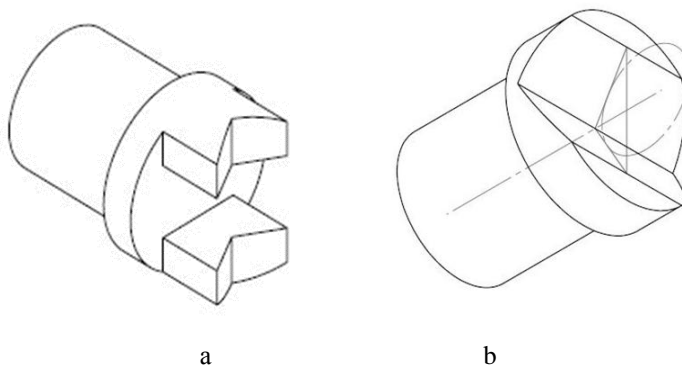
Schemes of clamps of the inner (a) and outer (b) cage of spherical bearings.
